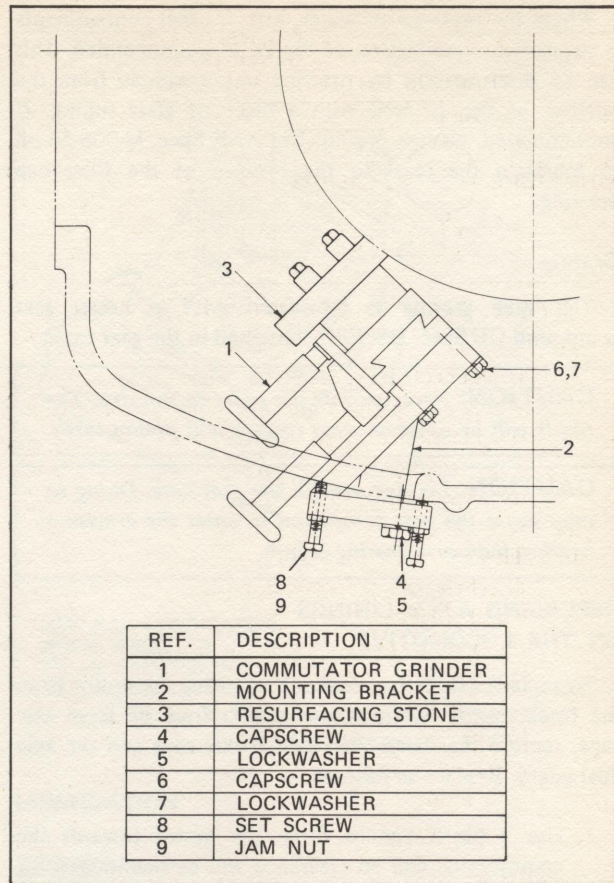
COMMUTATOR GRINDER PART 8837582G1.
